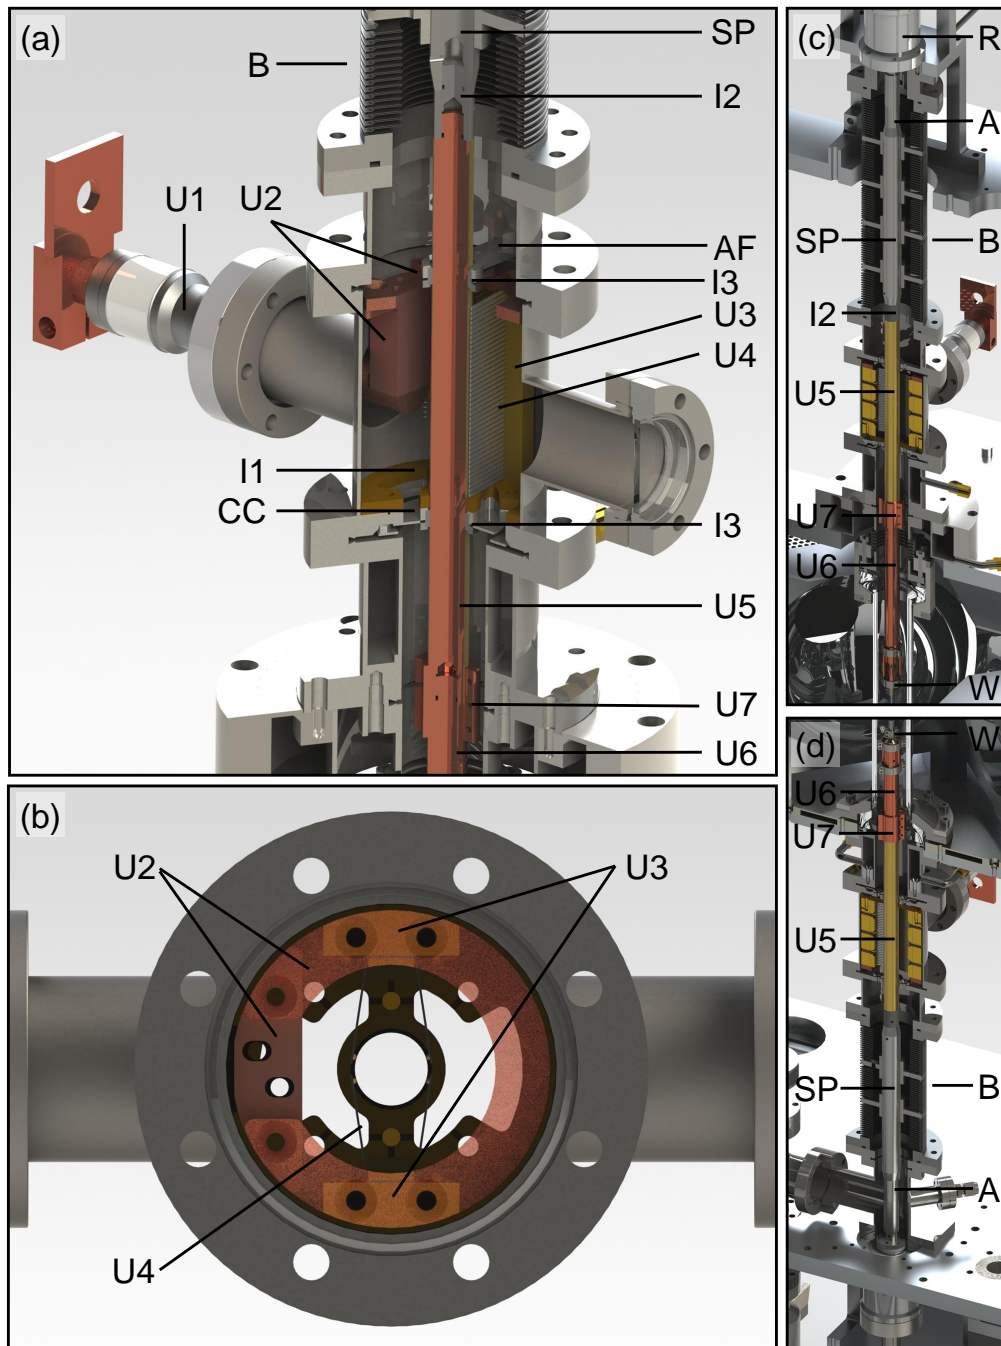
Electrotransport setup in the all-metal sealed image furnace. (a) Cut-away view of the feedthrough unit that allows to pass up to 400 A into the ultra-high vacuum chamber and onto the rotating shaft. The setup uses bespoke sliding contacts. (b) Top view of the feedthrough unit. (c) Cut-away view of the upper part of the image furnace. (d) Cut-away view of the lower part of the image furnace. (A) adjustment coupling, (B) metal bellow, (CC) cover, (I1)–(I3) insulating part, (R) rotation feedthrough, (SP) steel part of the shaft, (U1)–(U7) current bearing part, and (W) tungsten sample holder.
